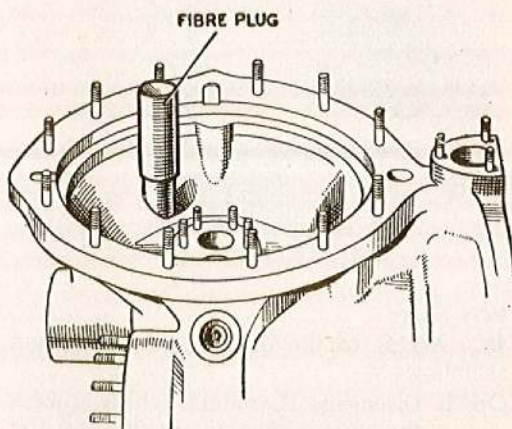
Fibre blanking plug for amplifier valve chamber suction port
